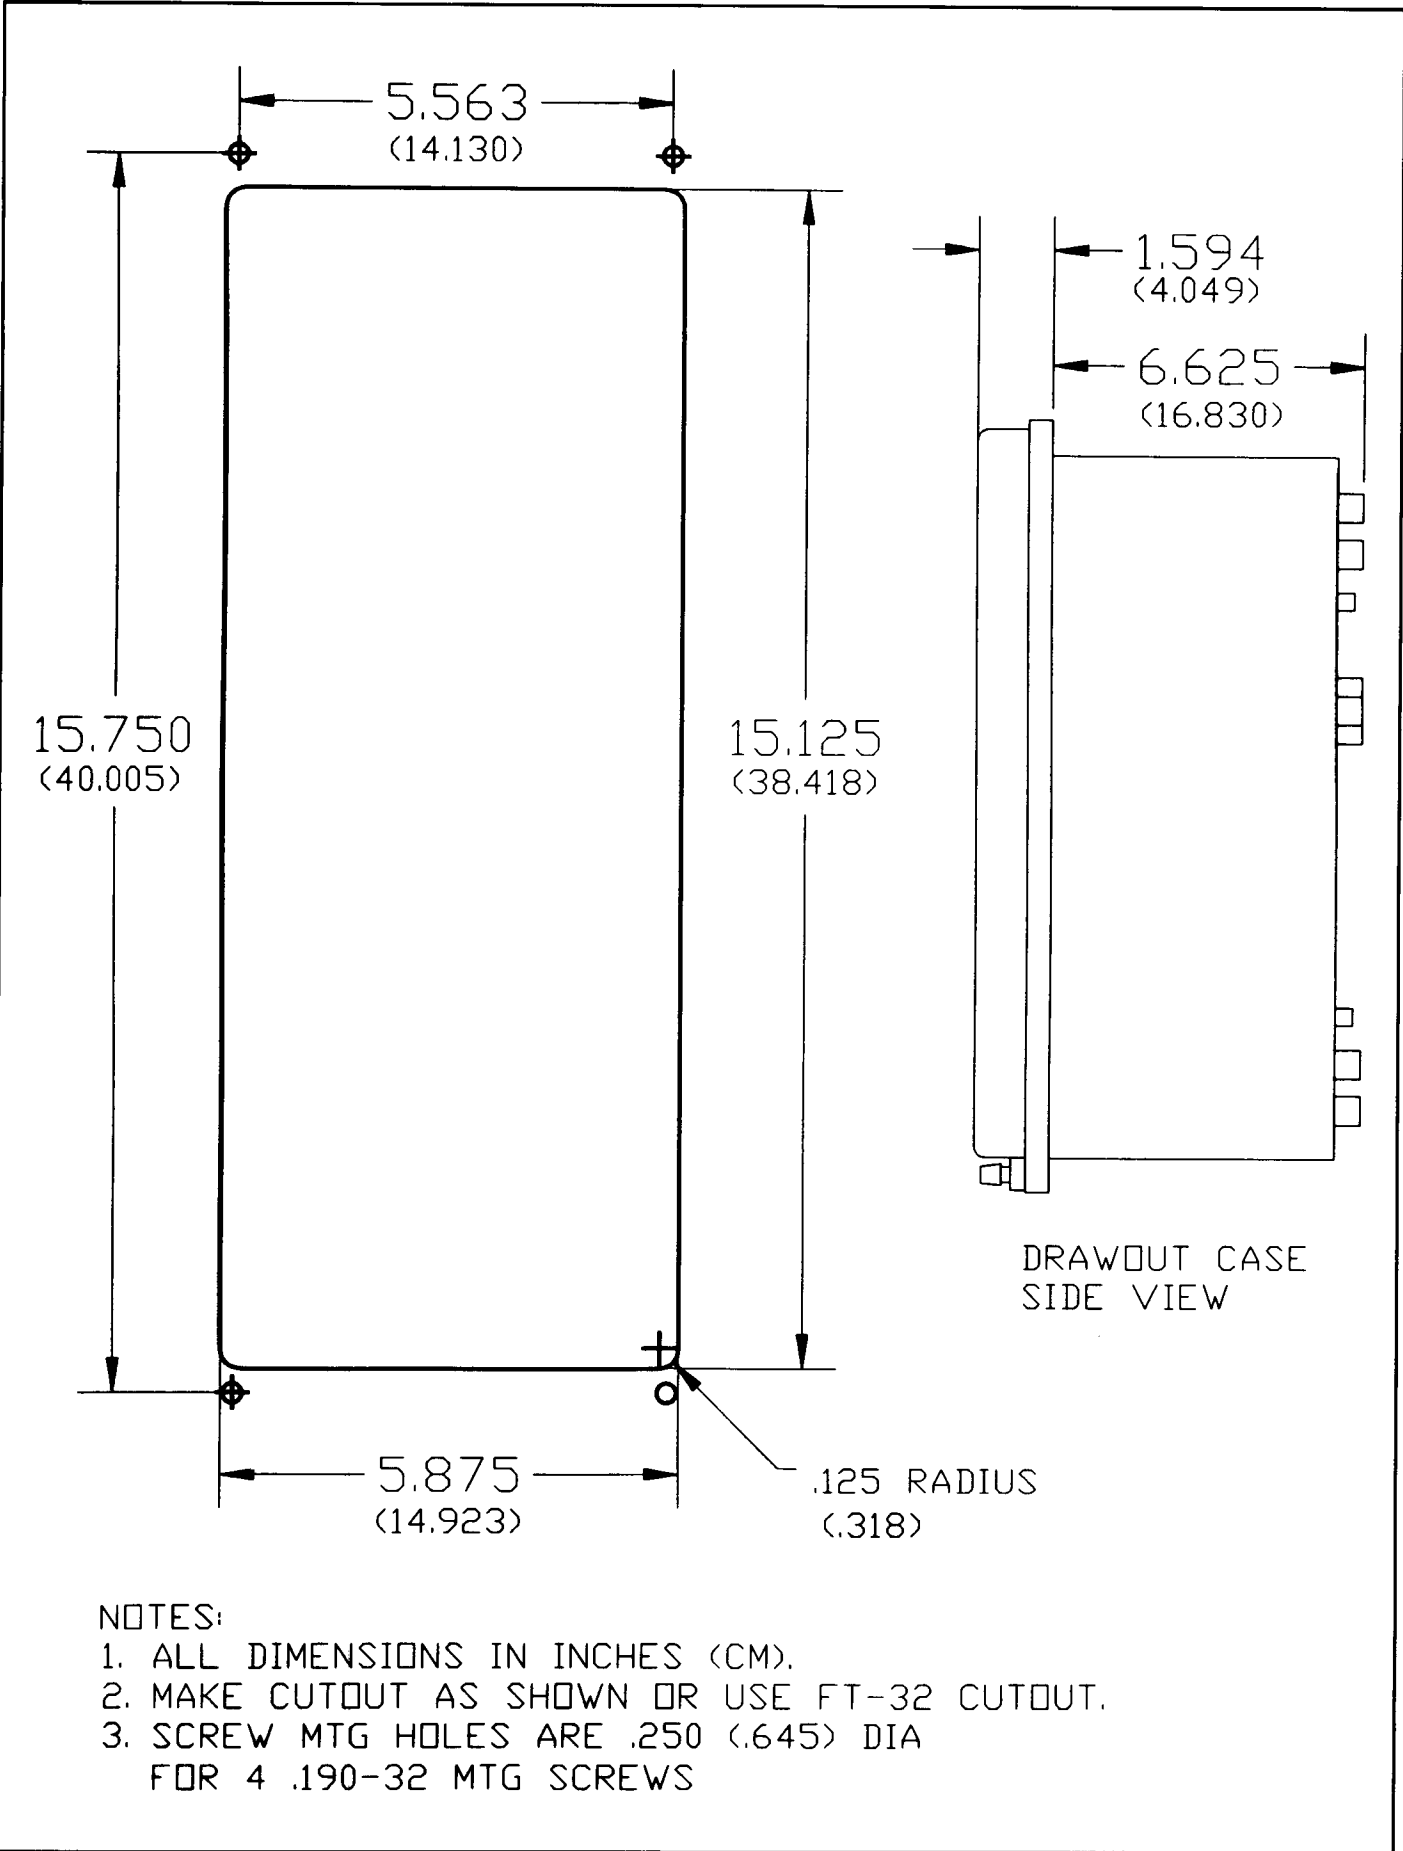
Cutout and Clearance Dimensions for IQ-1000 II Drawout Case.
